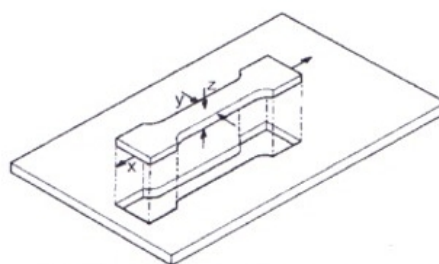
Cutting out the sample in the thin sheet's rolling direction
